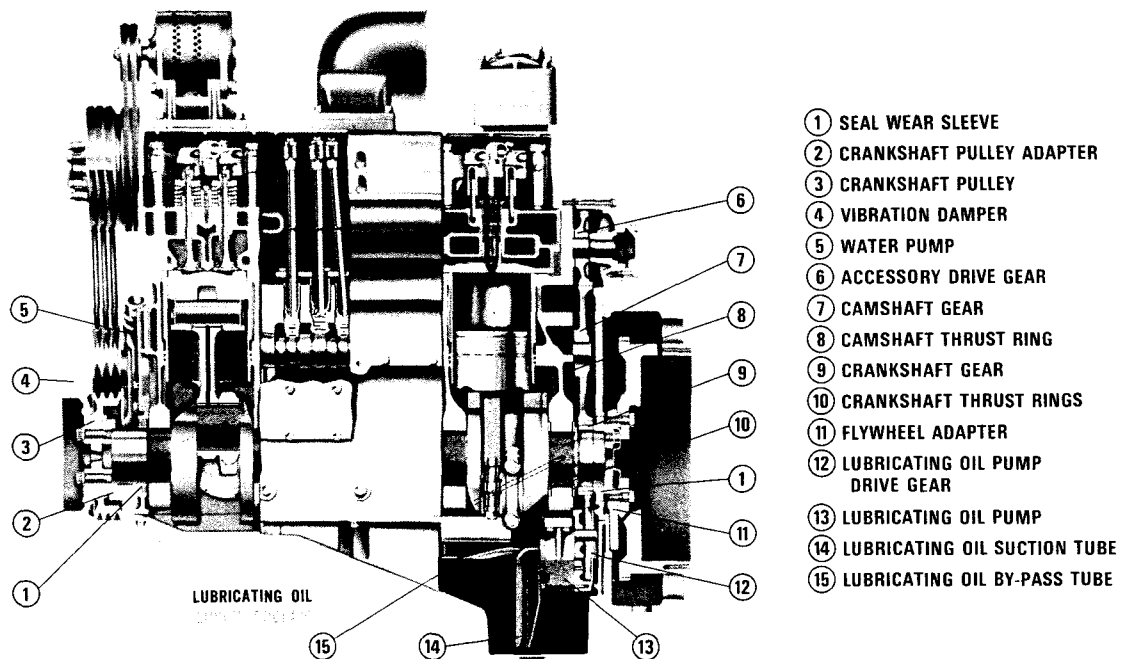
, (LWC-16). Lubricating oil and coolant flow — V-903 Engine
